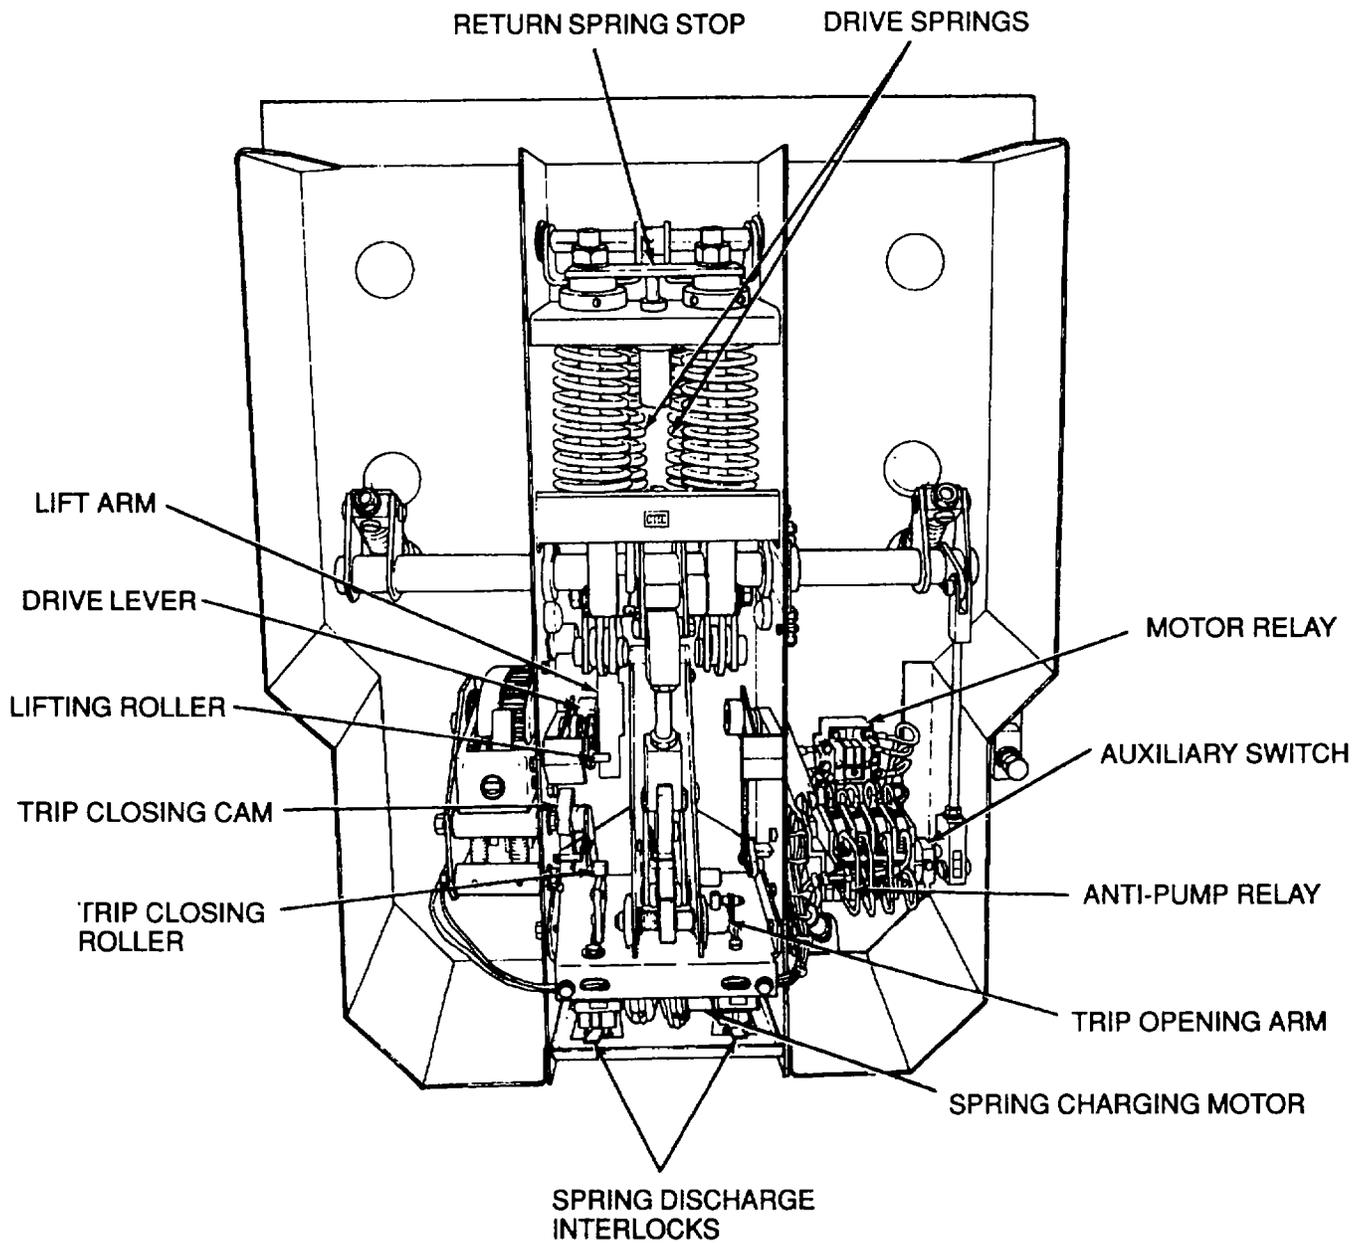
Load Circuit Breaker CB101, Front Right Side Interior View
